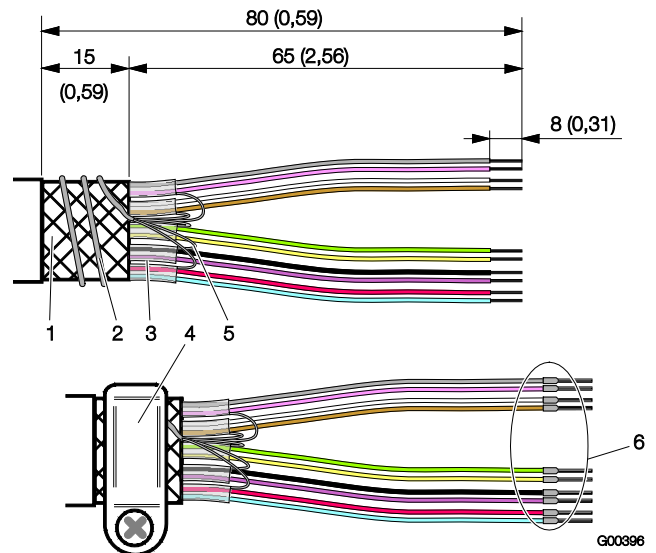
Signal cable assembly, dimensions in mm (inch)
